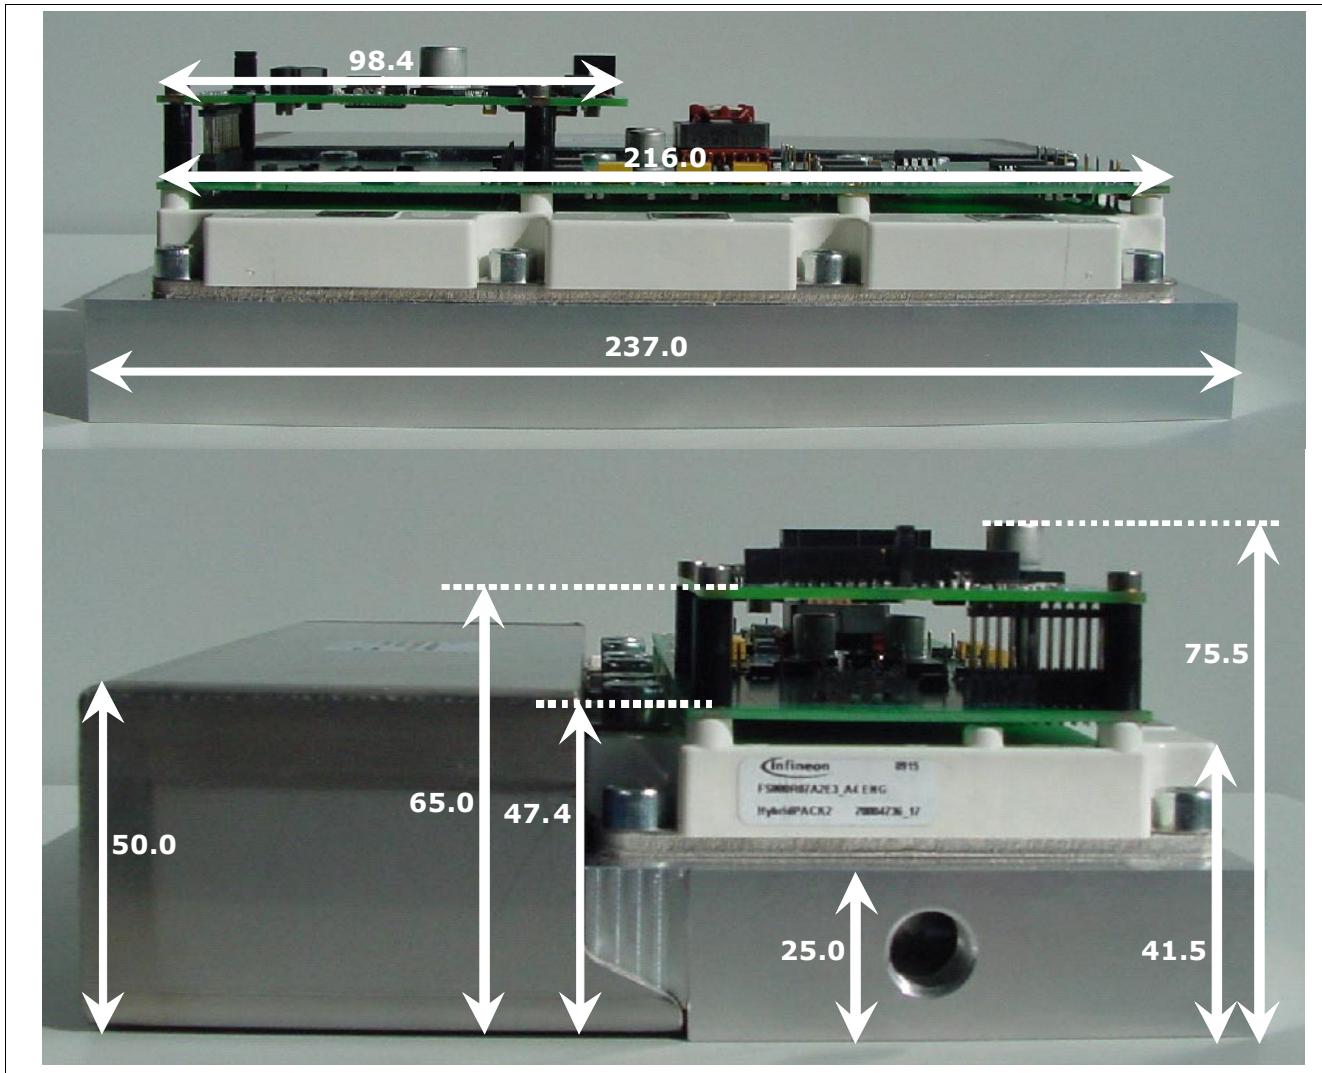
Dimensions of the Hybrid Kit for HybridPACK™2 (all dimensions are in mm)
